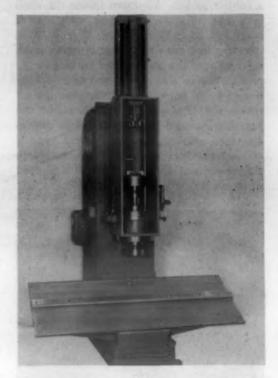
This press is used for "setting" the sleeves in the bores after cooling.
